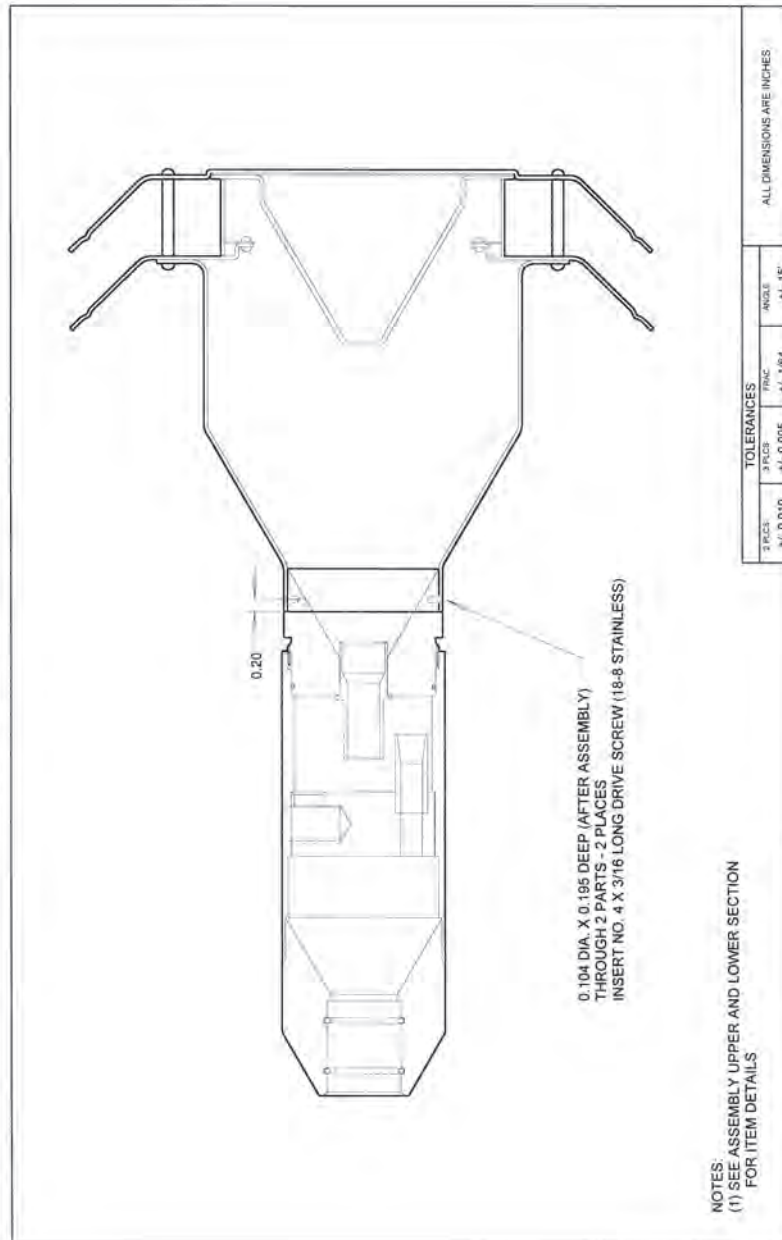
PM2.5 SAMPLER, ASSEMBLY
